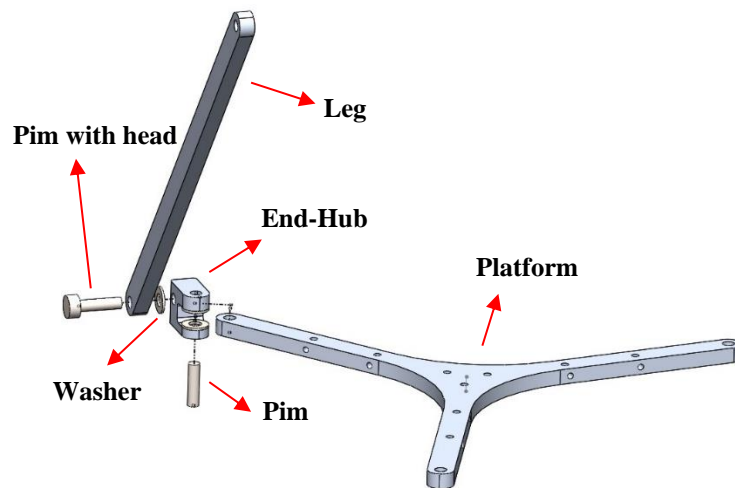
The elements used in HiDAM design in the exploded CAD view
